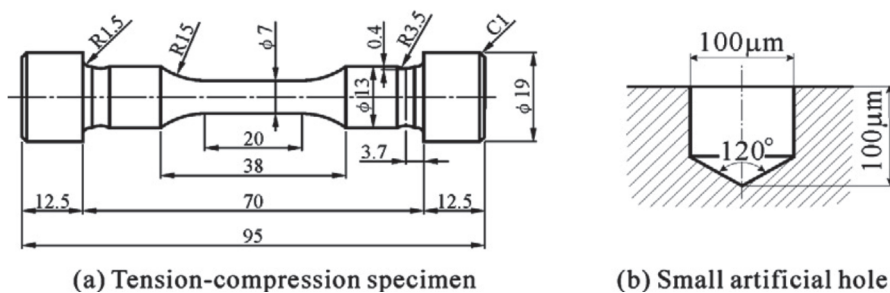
Geometry and dimensions of fatigue test specimens, in mm
